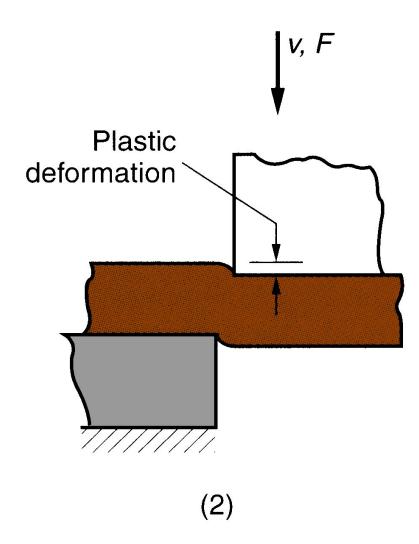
Shearing of sheet metal between two cutting edges:
